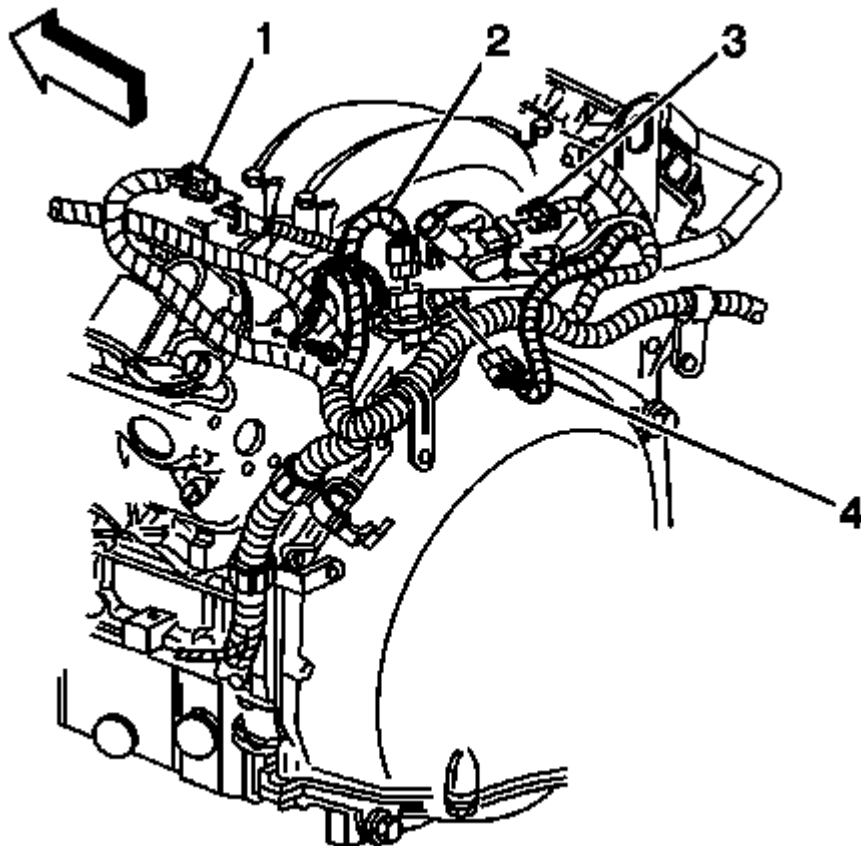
Oil Pressure Sensor/Switch Electrical Connector & Engine Wiring Harness Ground Strap
